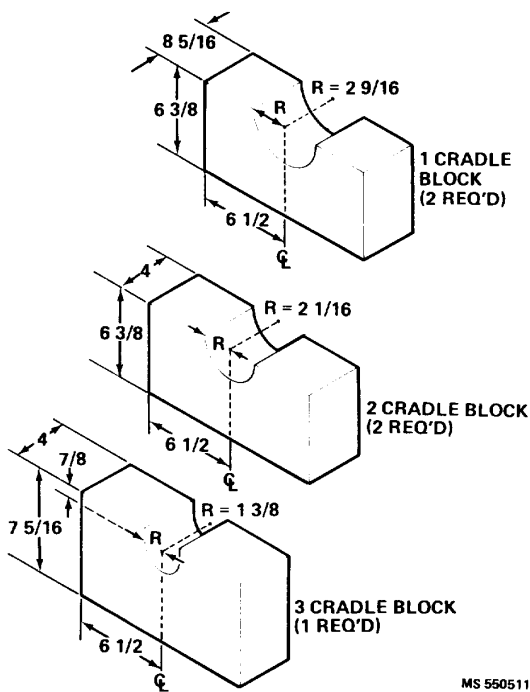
Elevator and Retractor Motor Cradle Blocks
